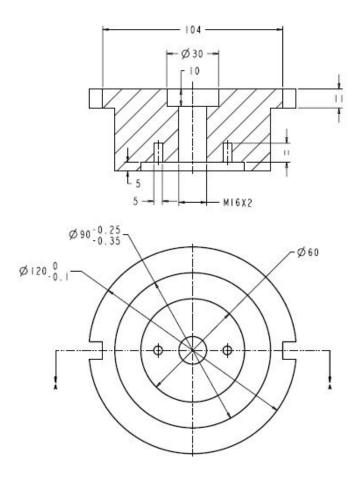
Technical Drawing of the Fixed Part of Upper Coining Die
